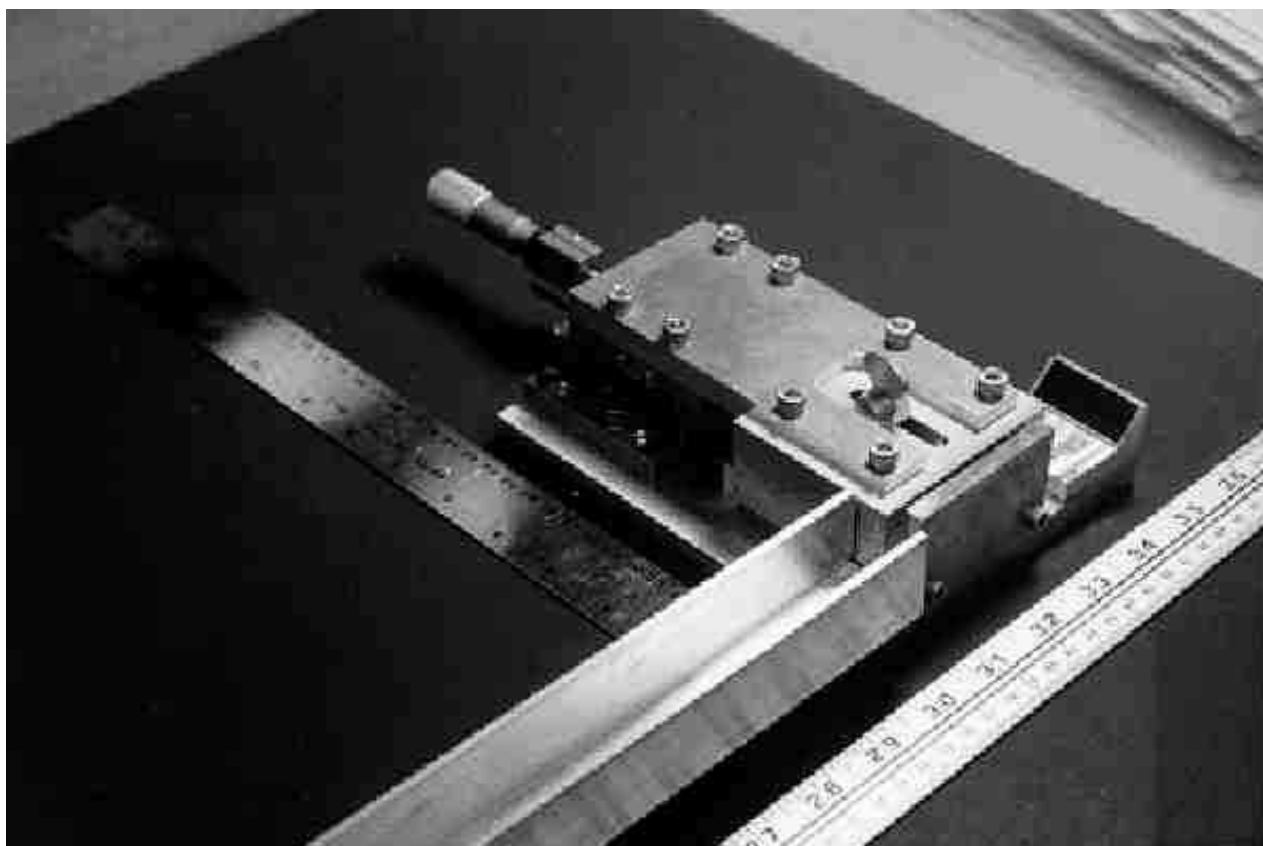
Pressing jig for gluing fiber arrays, based on a design by S. Barden. The inverted, U-shaped pressing channel, lower right, has a width controllable by a micrometer adjusted translation stage. A  $45^\circ$  mirror (middle-right) is used for inspecting the fiber array during construction and curing. The lower diagonal rail is for holding the fiber cable, not used in practice. The entire jig is designed to be taken apart and cleaned between presses.
